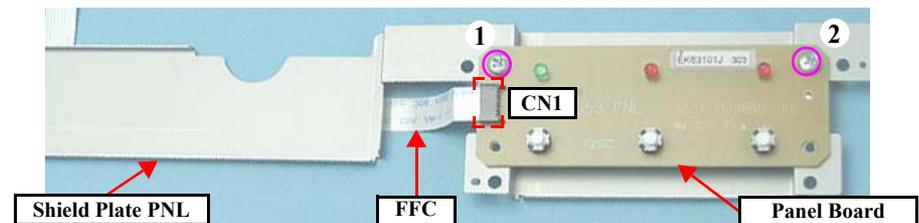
Removing the Panel Board (R260/R265/R270)
